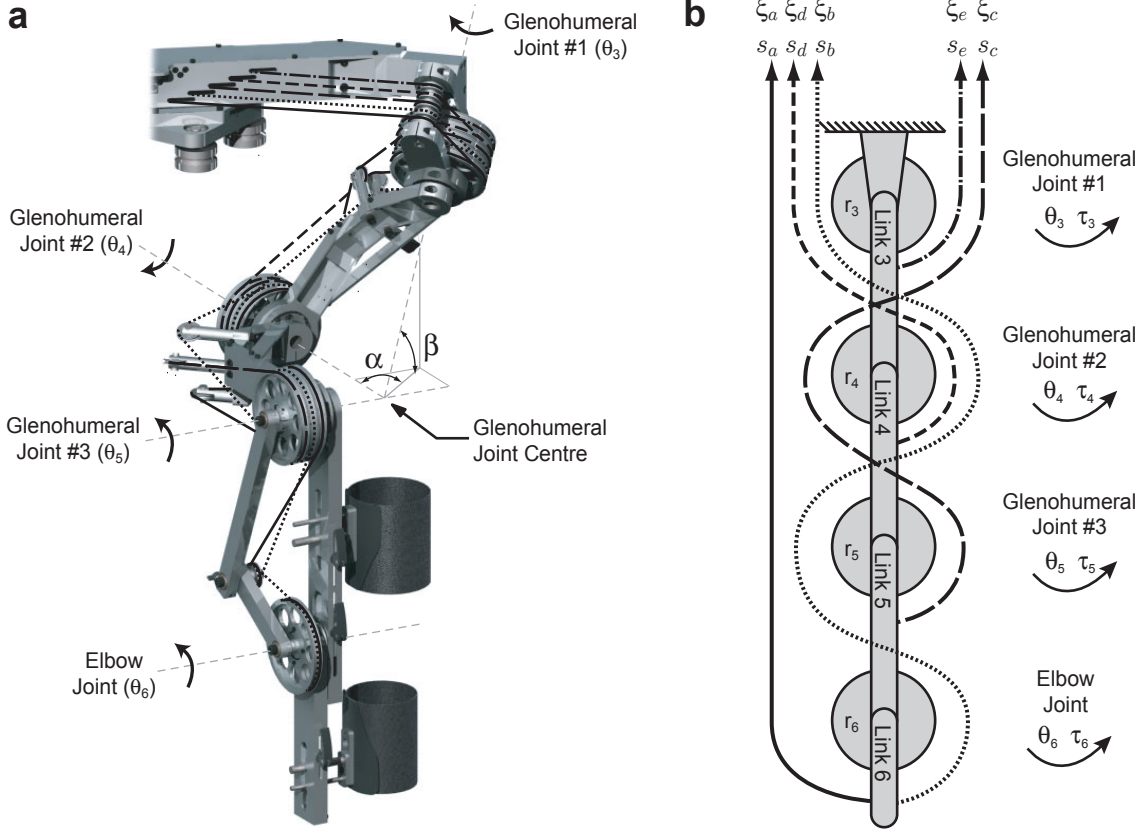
The shoulder/elbow mechanism is cable-driven. (a) A CAD drawing of the mechanism showing the selected mechanism with cables included. (b) A simplified planar schematic representation of the selected cable routing structure. Each of the five cables is denoted by a different line type. Each joint has a separate pulley for each cable that passes by the joint. Symbols s , ξ , r , τ and θ represent cable displacement, cable force, pulley radius, joint torque and joint angle respectively.
